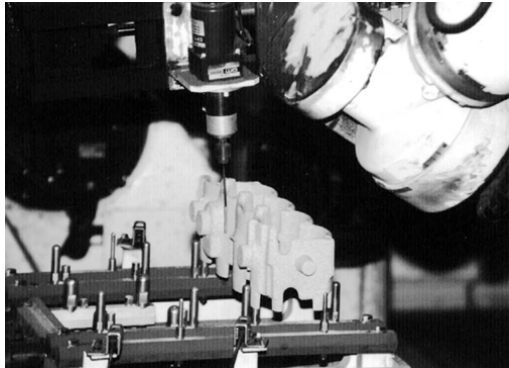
Definining the water-jacket core on the holding fixture with the robot-manipulated, drill-like spring-tipped steel rod.
